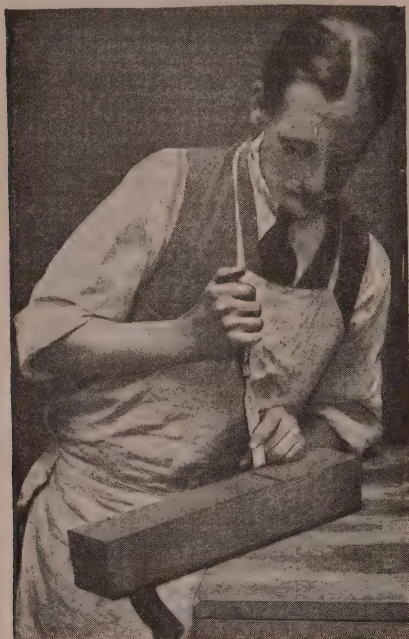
Cutting Sole of Plane for Mouthpiece
